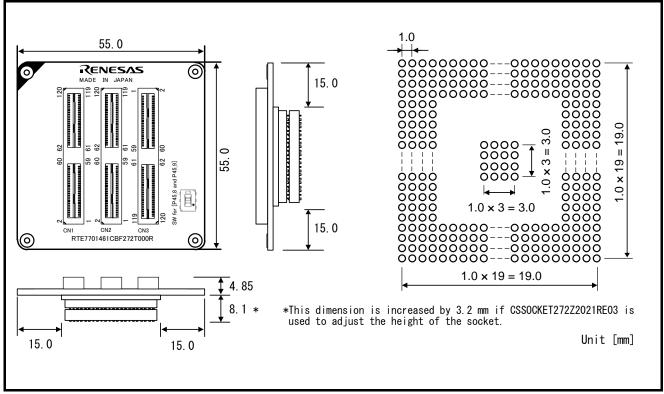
Drawing with Dimensions and a Pad Pattern for Reference
